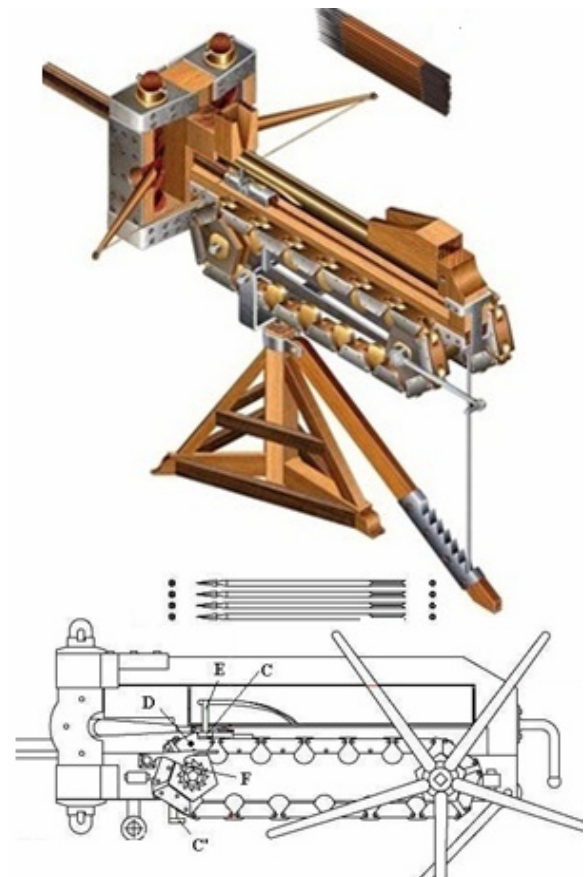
Pictorial reconstruction and technical drawing of the repeating catapult. Adapted from [15].
